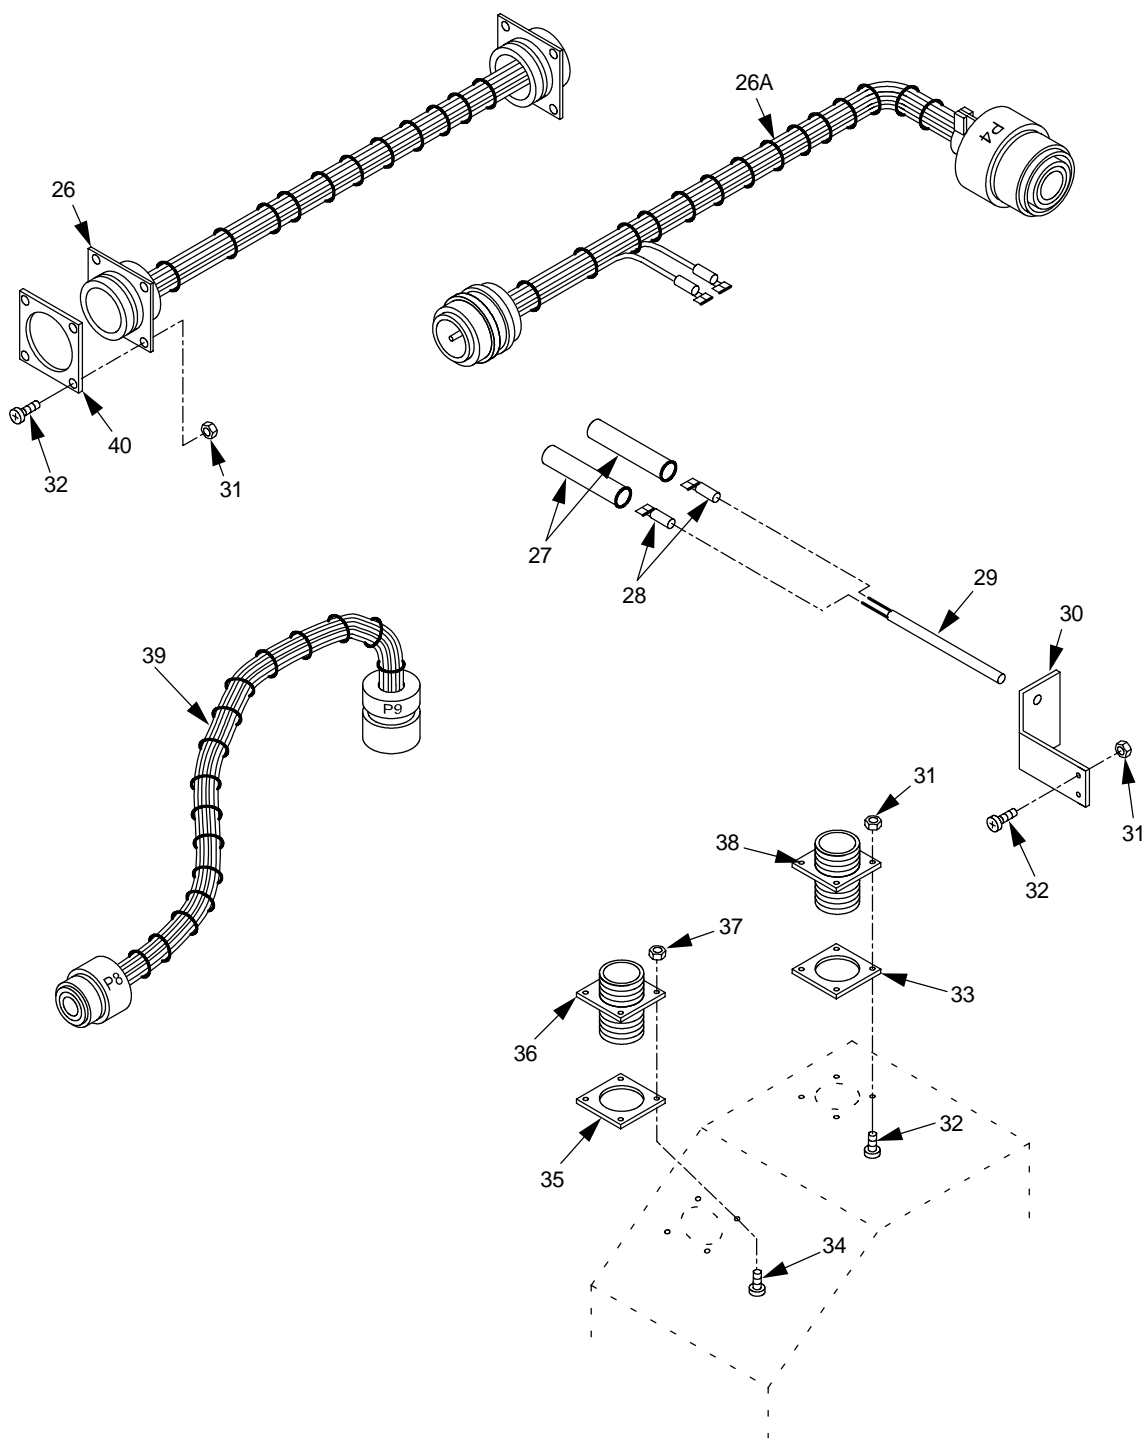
Evaporator Assembly (Sheet 2 of 4)
